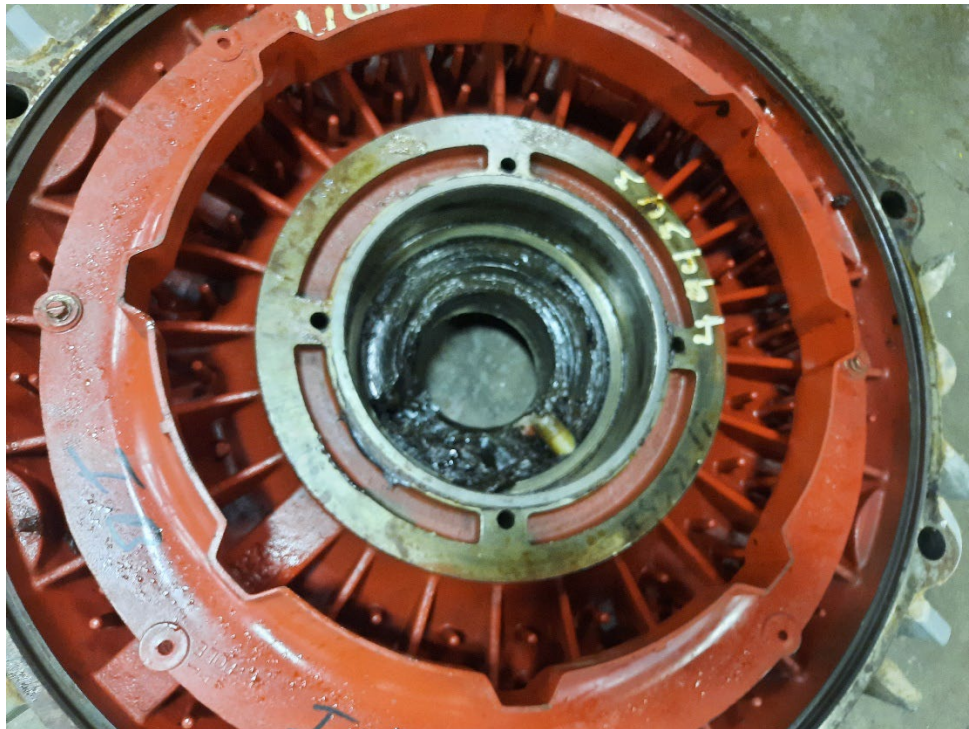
Drive end bearing and rotor once the end shield was removed.
